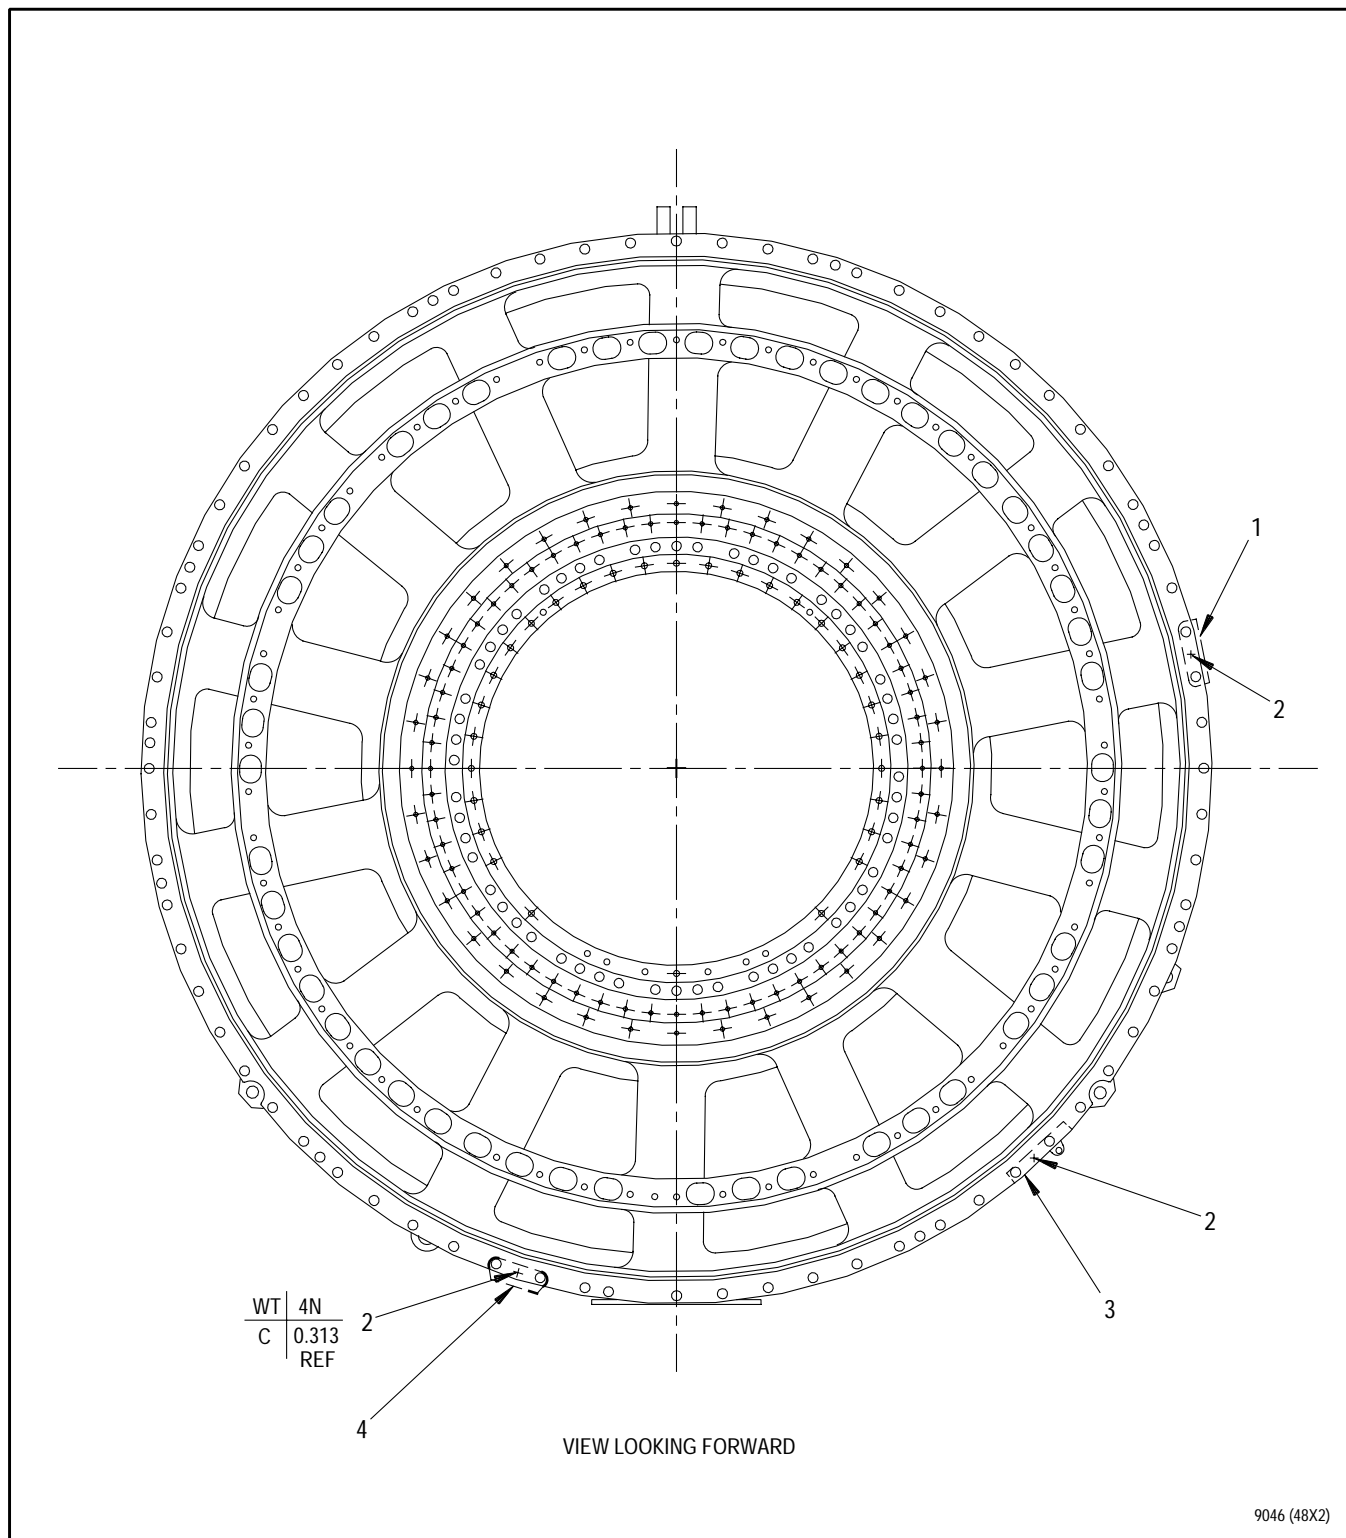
Compressor Intermediate Case Assembly - Bracket Replacement (Sheet 1 of 2)
